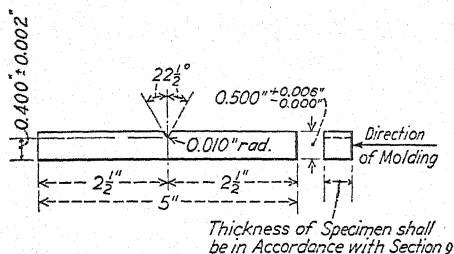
Simple Beam (Charpy Type) Impact Test Specimen.
